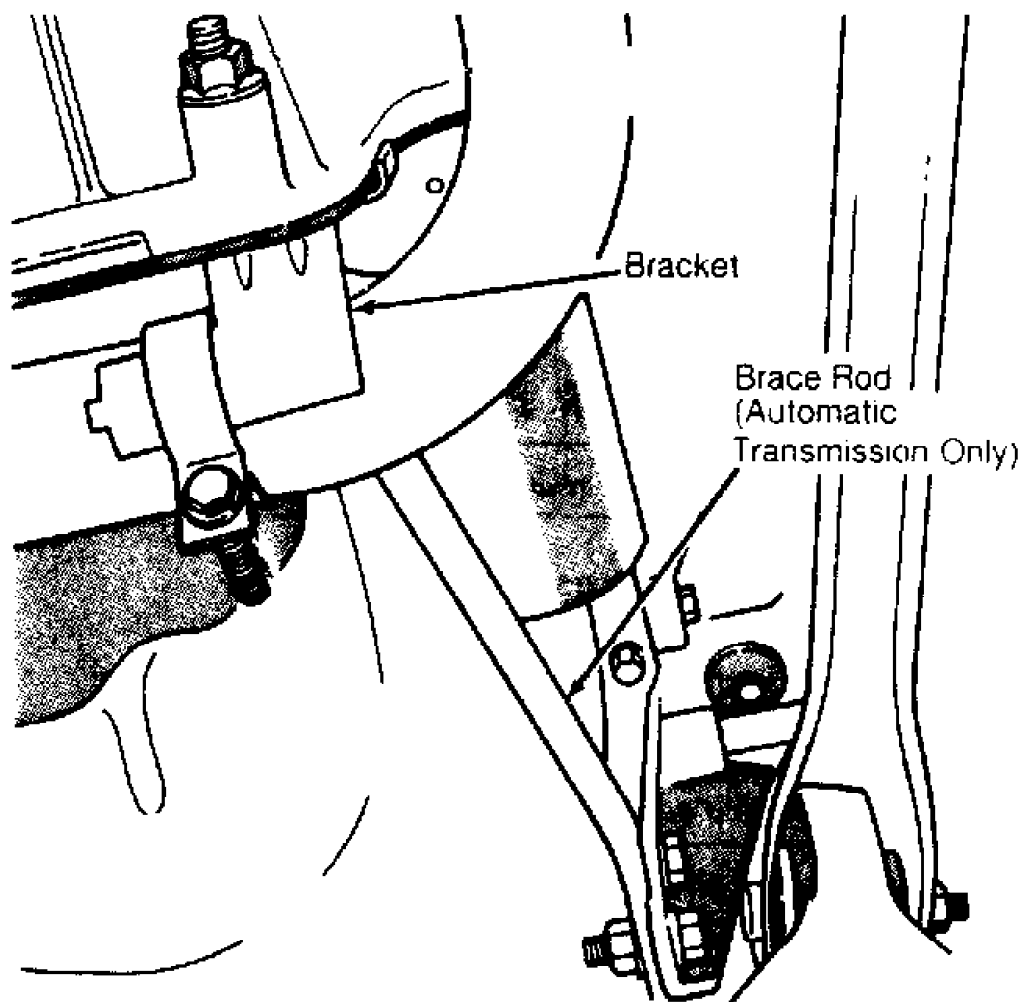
Removing Engine Exhaust Clamp & Brace (2.5L)
